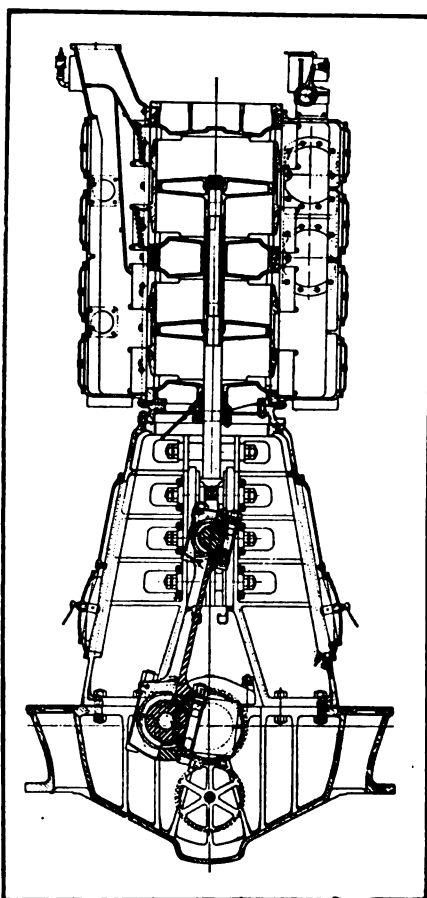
CROSS SECTION THROUGH SCAVENGING PUMP
